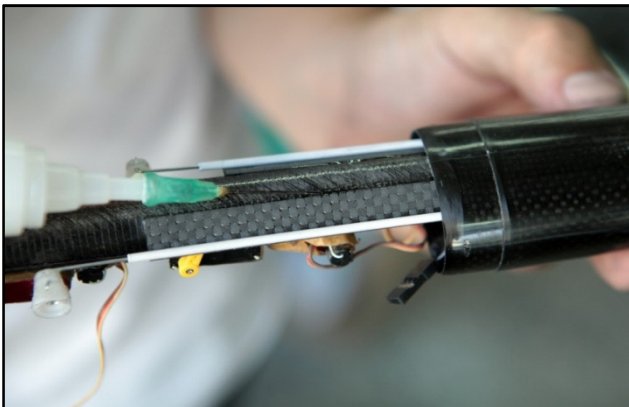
Gluing flaperon stiffening carbon sheet
